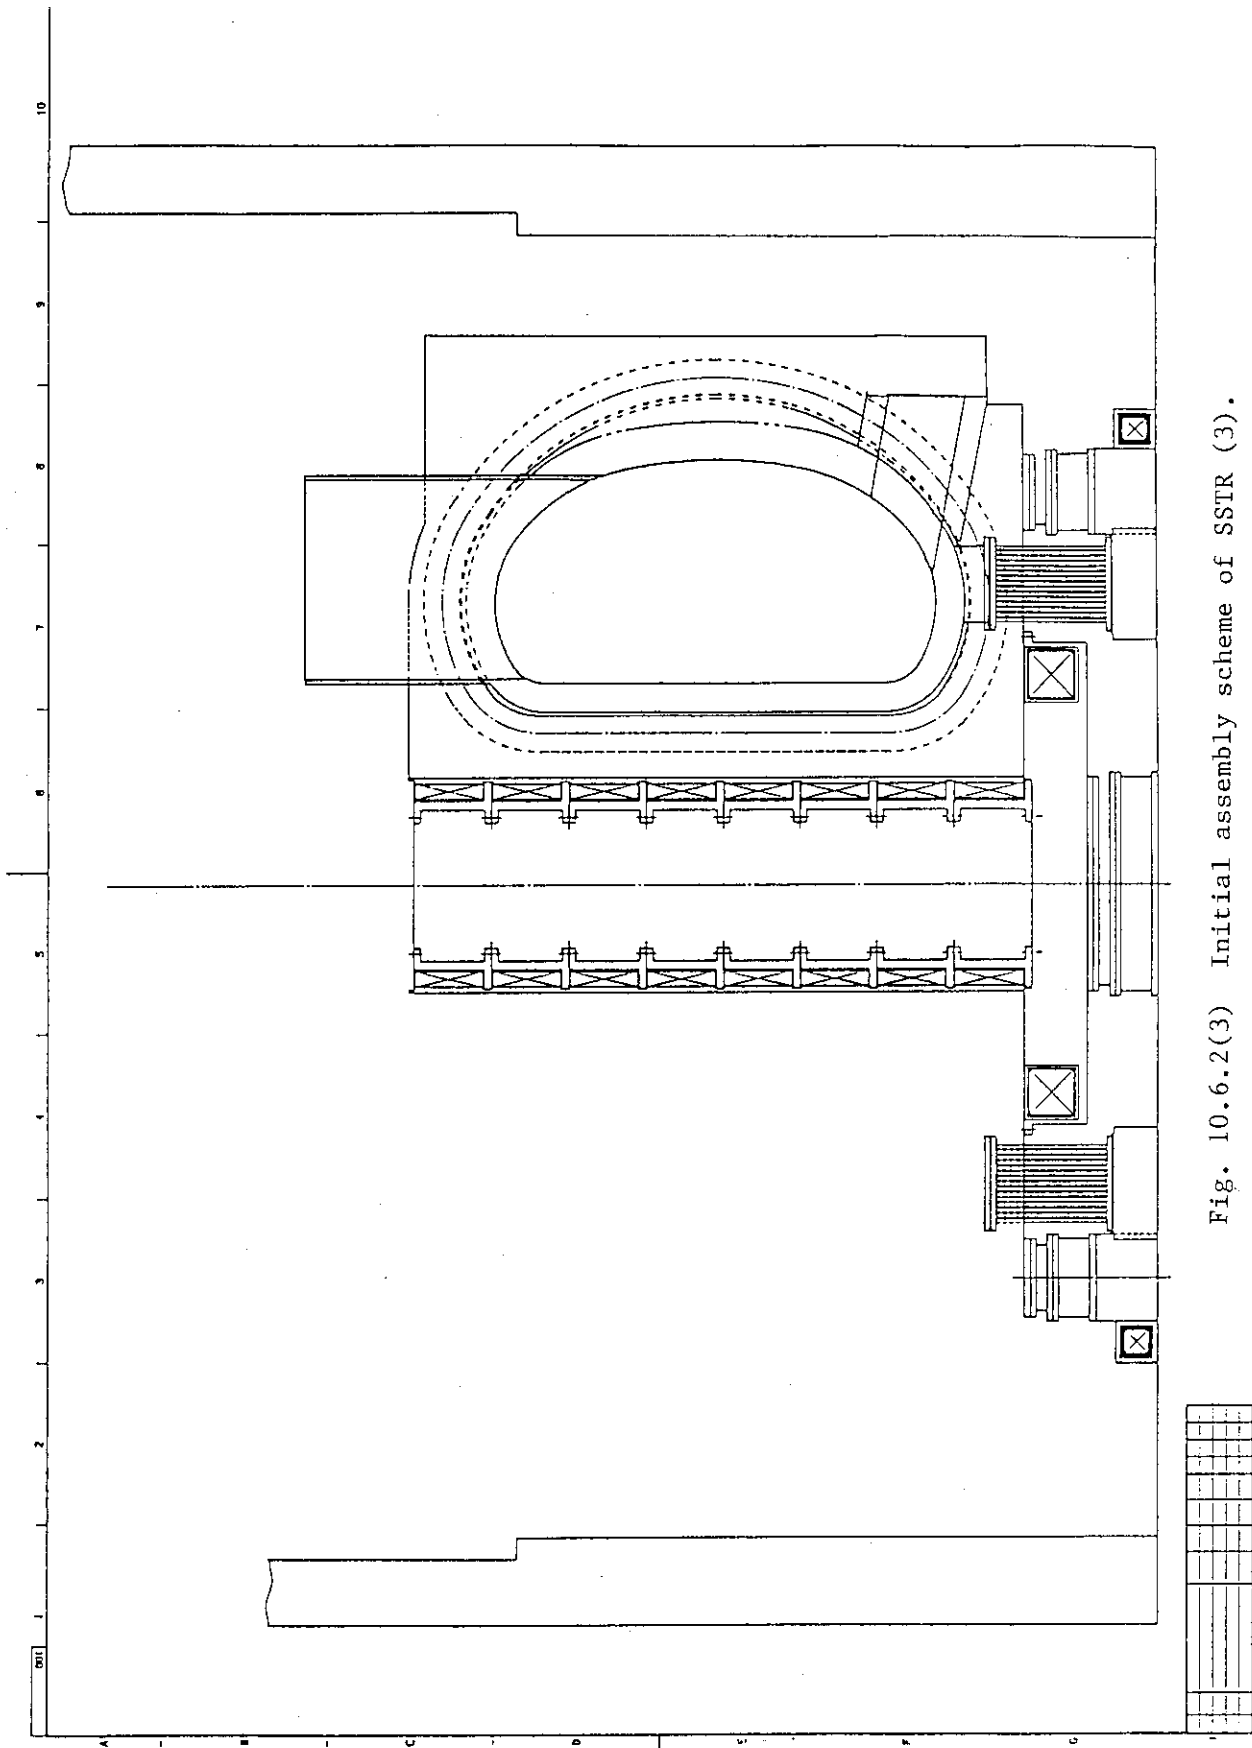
(3) Initial assembly scheme of SSTR (3).
